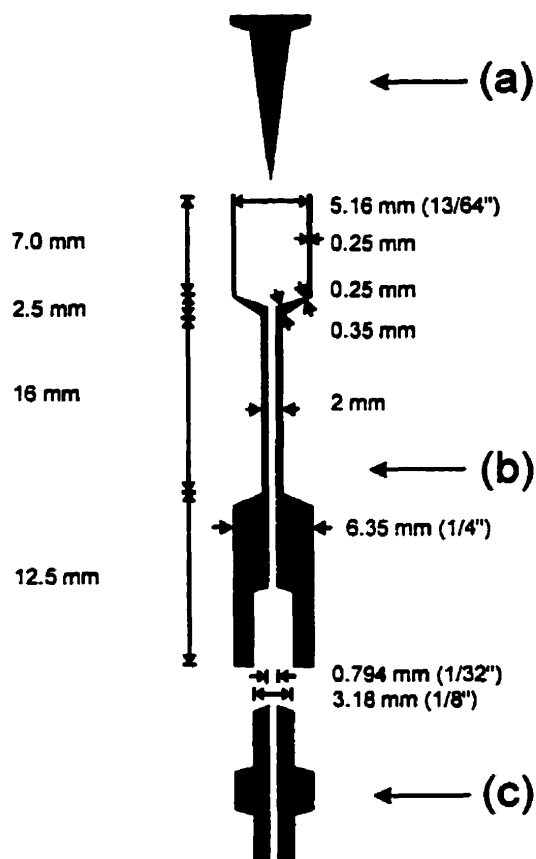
Dimensions of DSI probe and components: (a) 'tack'; (b) sample probe; (c) connector. Measurements in Imperial units (except for diameter of probe base) indicate dimensions of tools used for machining component indicated.
